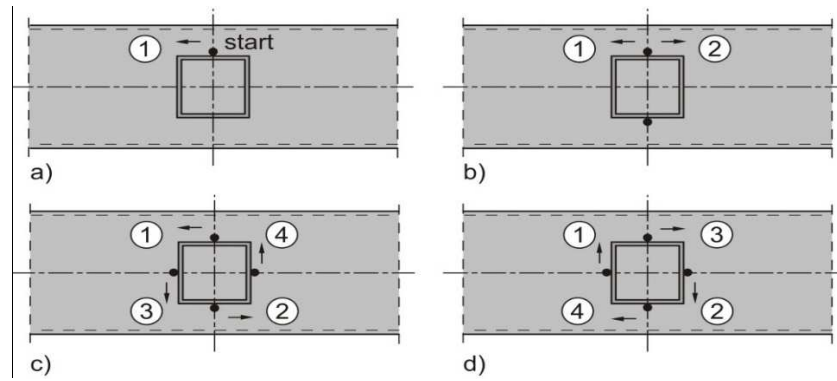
Weld sequences studied in this thesis. From left to right progressive welding, double-phase progressive welding, skip welding and reverse skip welding.
